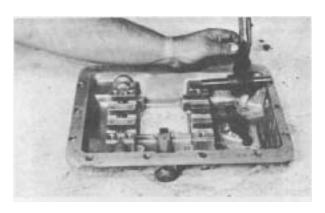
Install 1st & reverse shift fork and rail assembly in control housing. Install shift rail lock pin to position rail in control housing.
